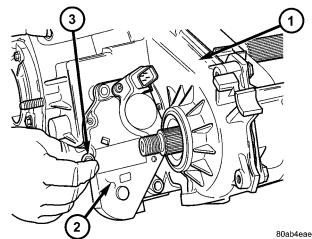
Remove the Shift Motor and Mode Sensor Assembly Bolts - Typical
